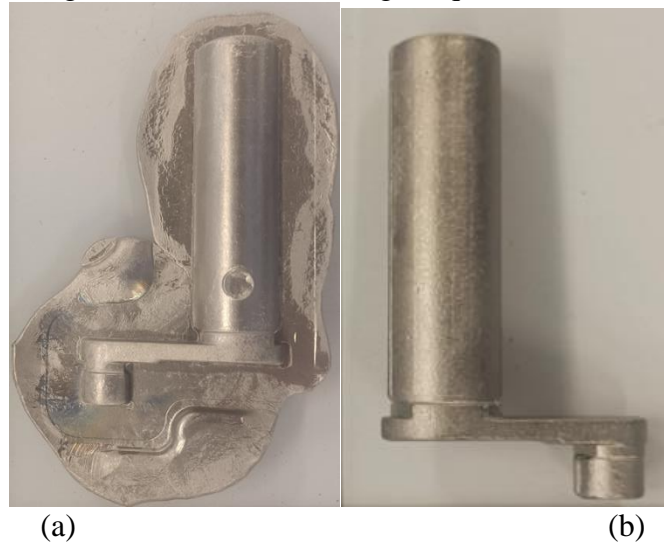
Finished crank forging (a) without trimming, (b) after trimming
